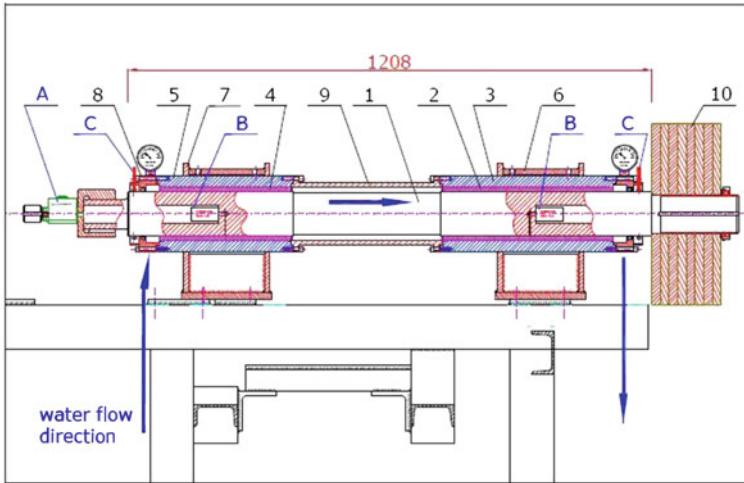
Stern-Tube test stand with two bearings [29]. 1 Main shaft $\phi 100$ mm. 2, 3 Stern-tube bearing. 4,5 Front bearing. 6, 7 Supports. 8 Covers with sealing. 9 Connecting pipe. 10 Radial load—discs. A Torqmeter. B Pressure pickup sensors. C Touch less distance sensors
